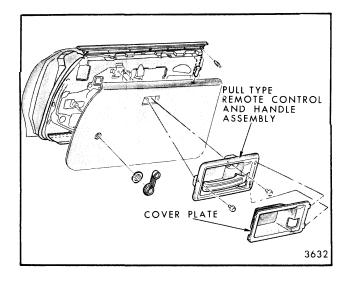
Typical Door Lock Remote Control and Handle Assembly Installation
